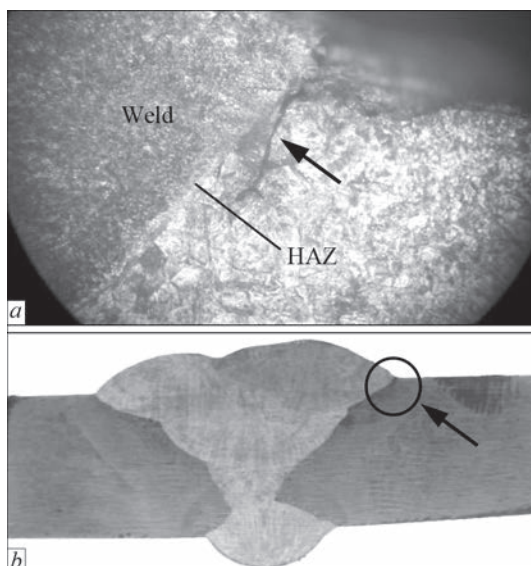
Typical fatigue crack formation and propagation (*a*, ×100) in welded joints (*b*) of armor steel HB500MOD
